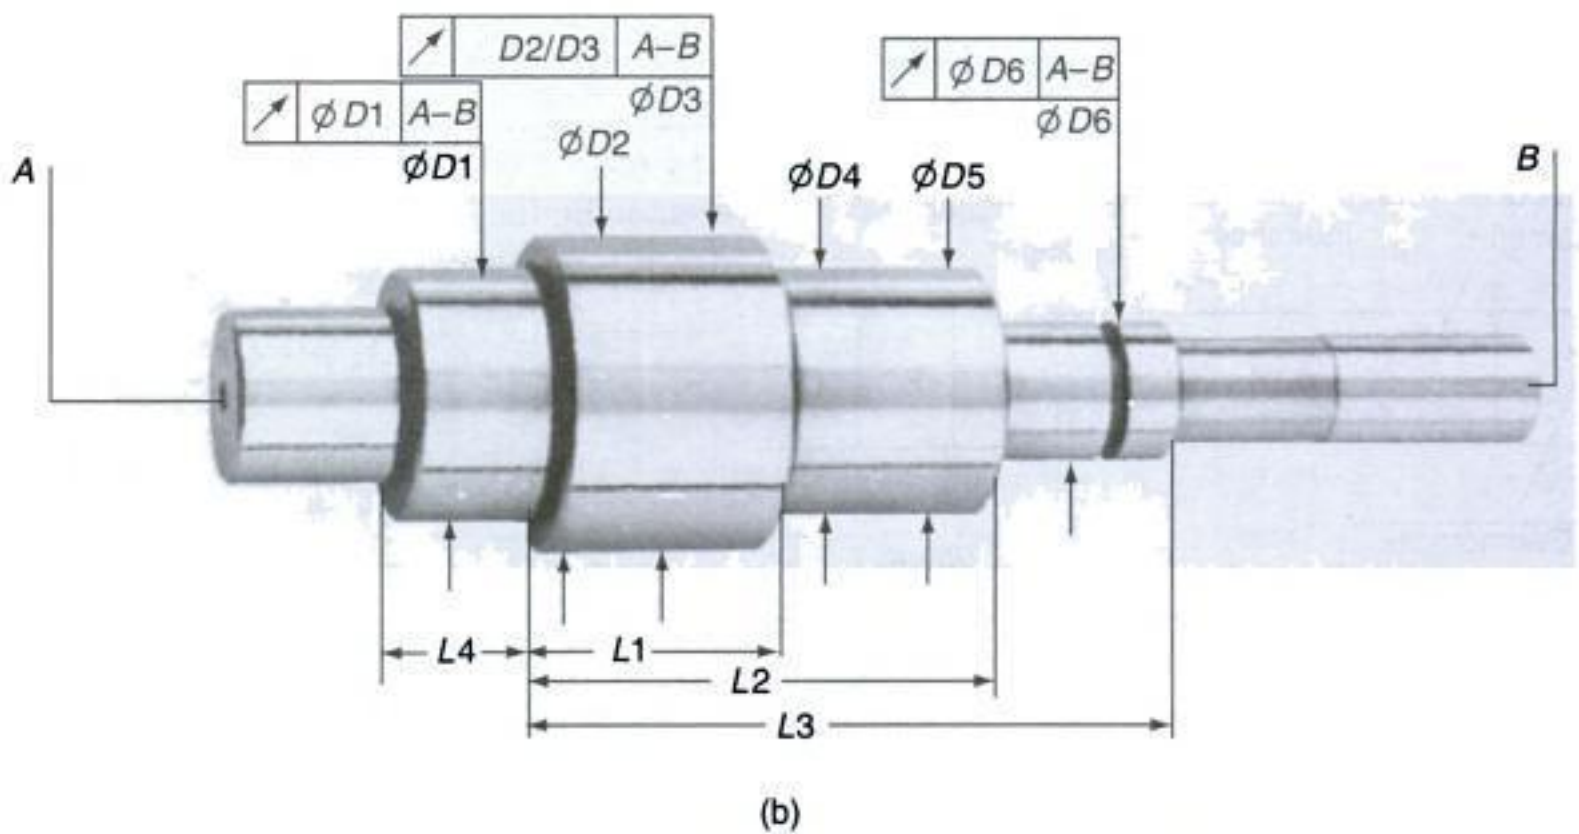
(b) Examples of representation of features of geometric tolerances in engineering drawing of parts
